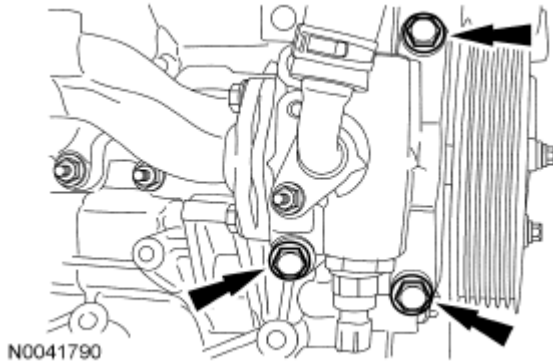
Locating Power Steering Pump And Reservoir Assembly Engine Bolts
